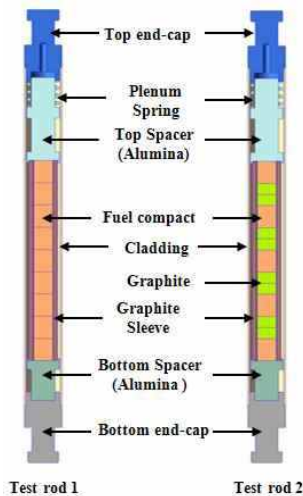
Schematic construction layout of the 2 fuel rod specimens in the test capsule [2]
